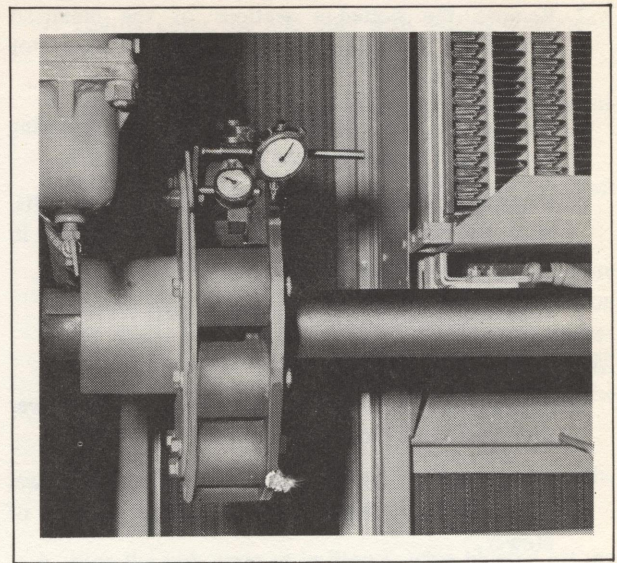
CHECKING ALIGNMENT BETWEEN COMPRESSOR AND FAN GEAR UNIT.
